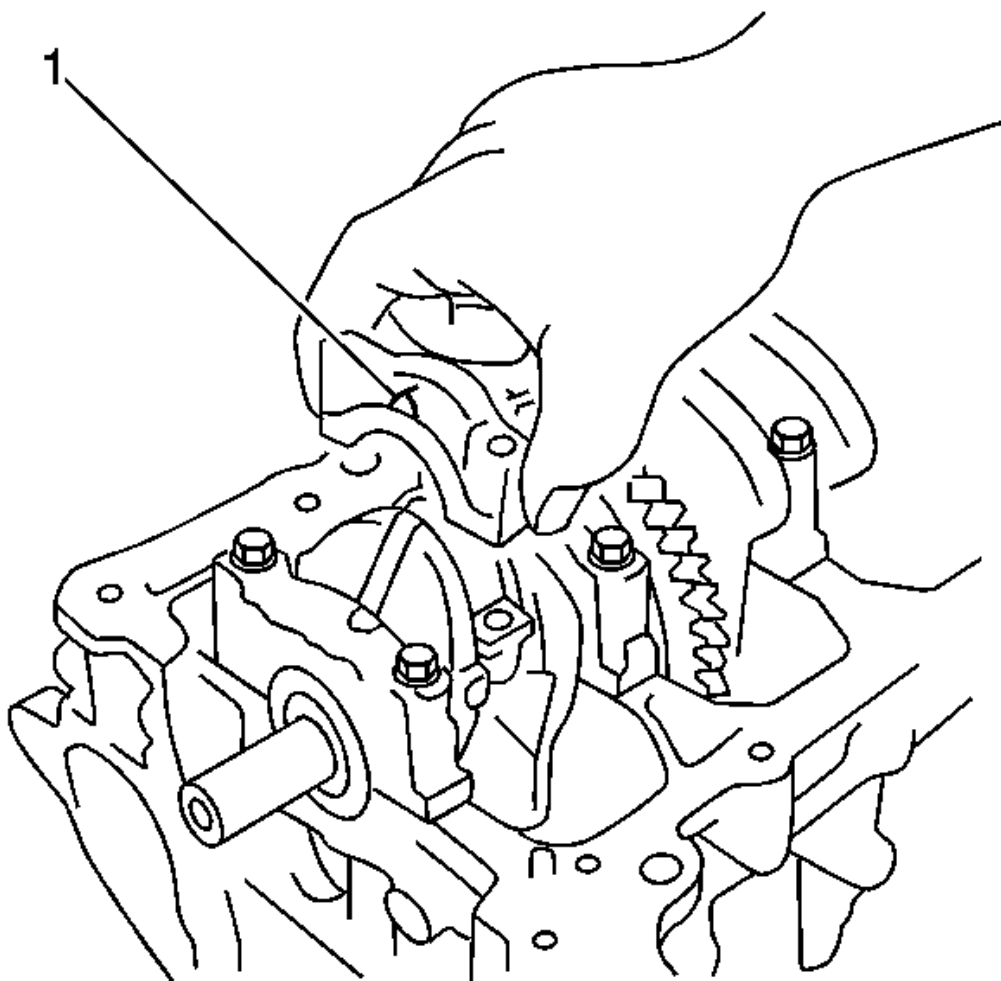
Verifying Connecting Rod Cap Is Facing Forward
